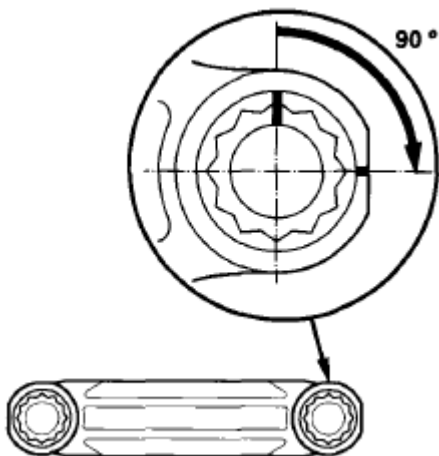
Identifying Specified Angle For Tightening Connecting Rod Bolt
